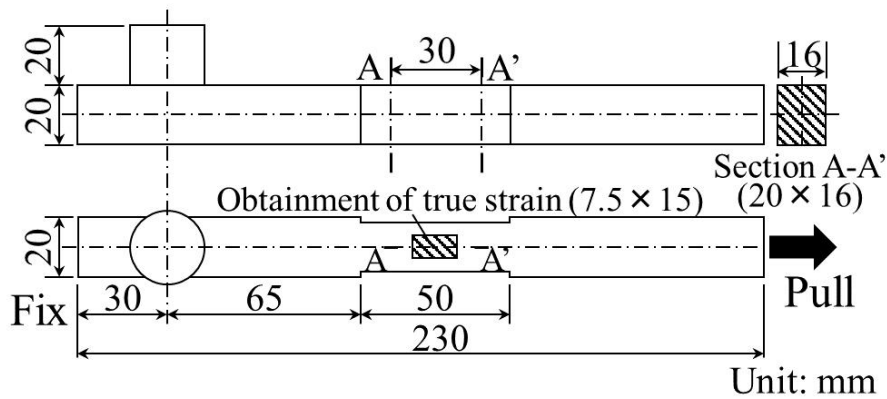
Dimensions of tensile test specimen during partial solidification.
